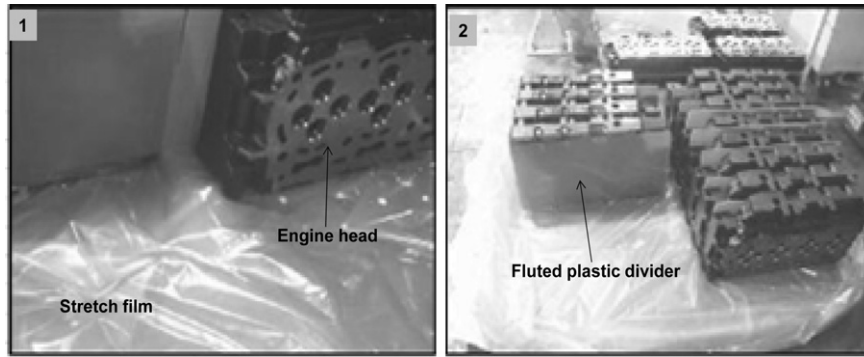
Arrangement of engine heads during the assembly of the disposable packaging: (1) stretch film and engine head details, (2) overall view of engine heads separated by fluted plastic dividers.
